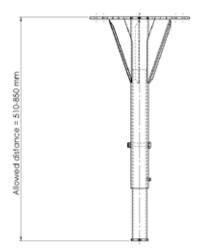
Telescope ceiling bracket, 510 - 850 mm (SWL 300 kg)
